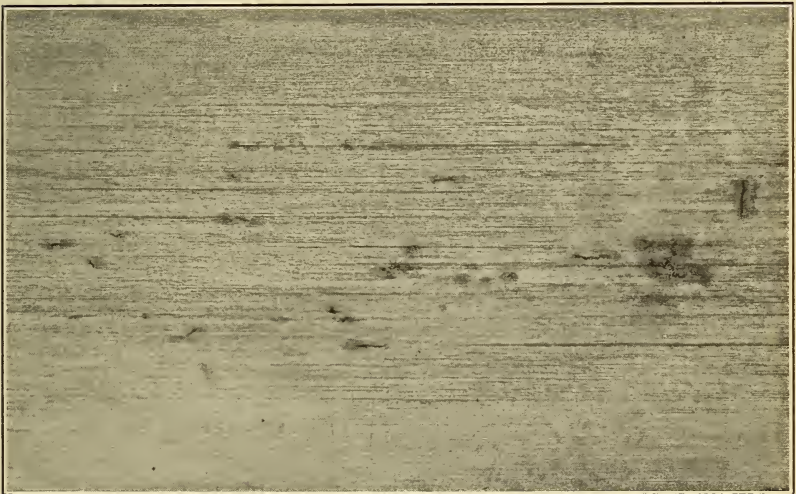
Longitudinal horizontal section three-fourths inch below the tread of used rail NC. $\times 1$ showing shatter cracks
